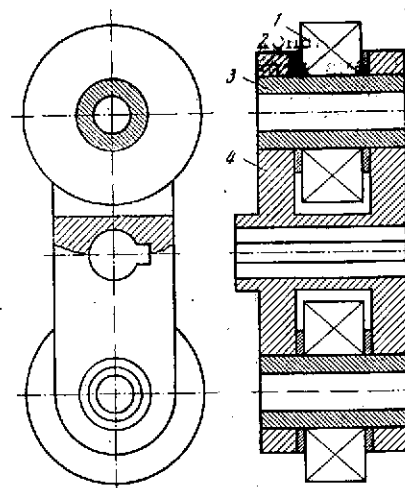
Two-roll generator of free deformation. 1 -- roll (ball bearing); 2 -- ring; 3 -- finger; 4 -- pole.
